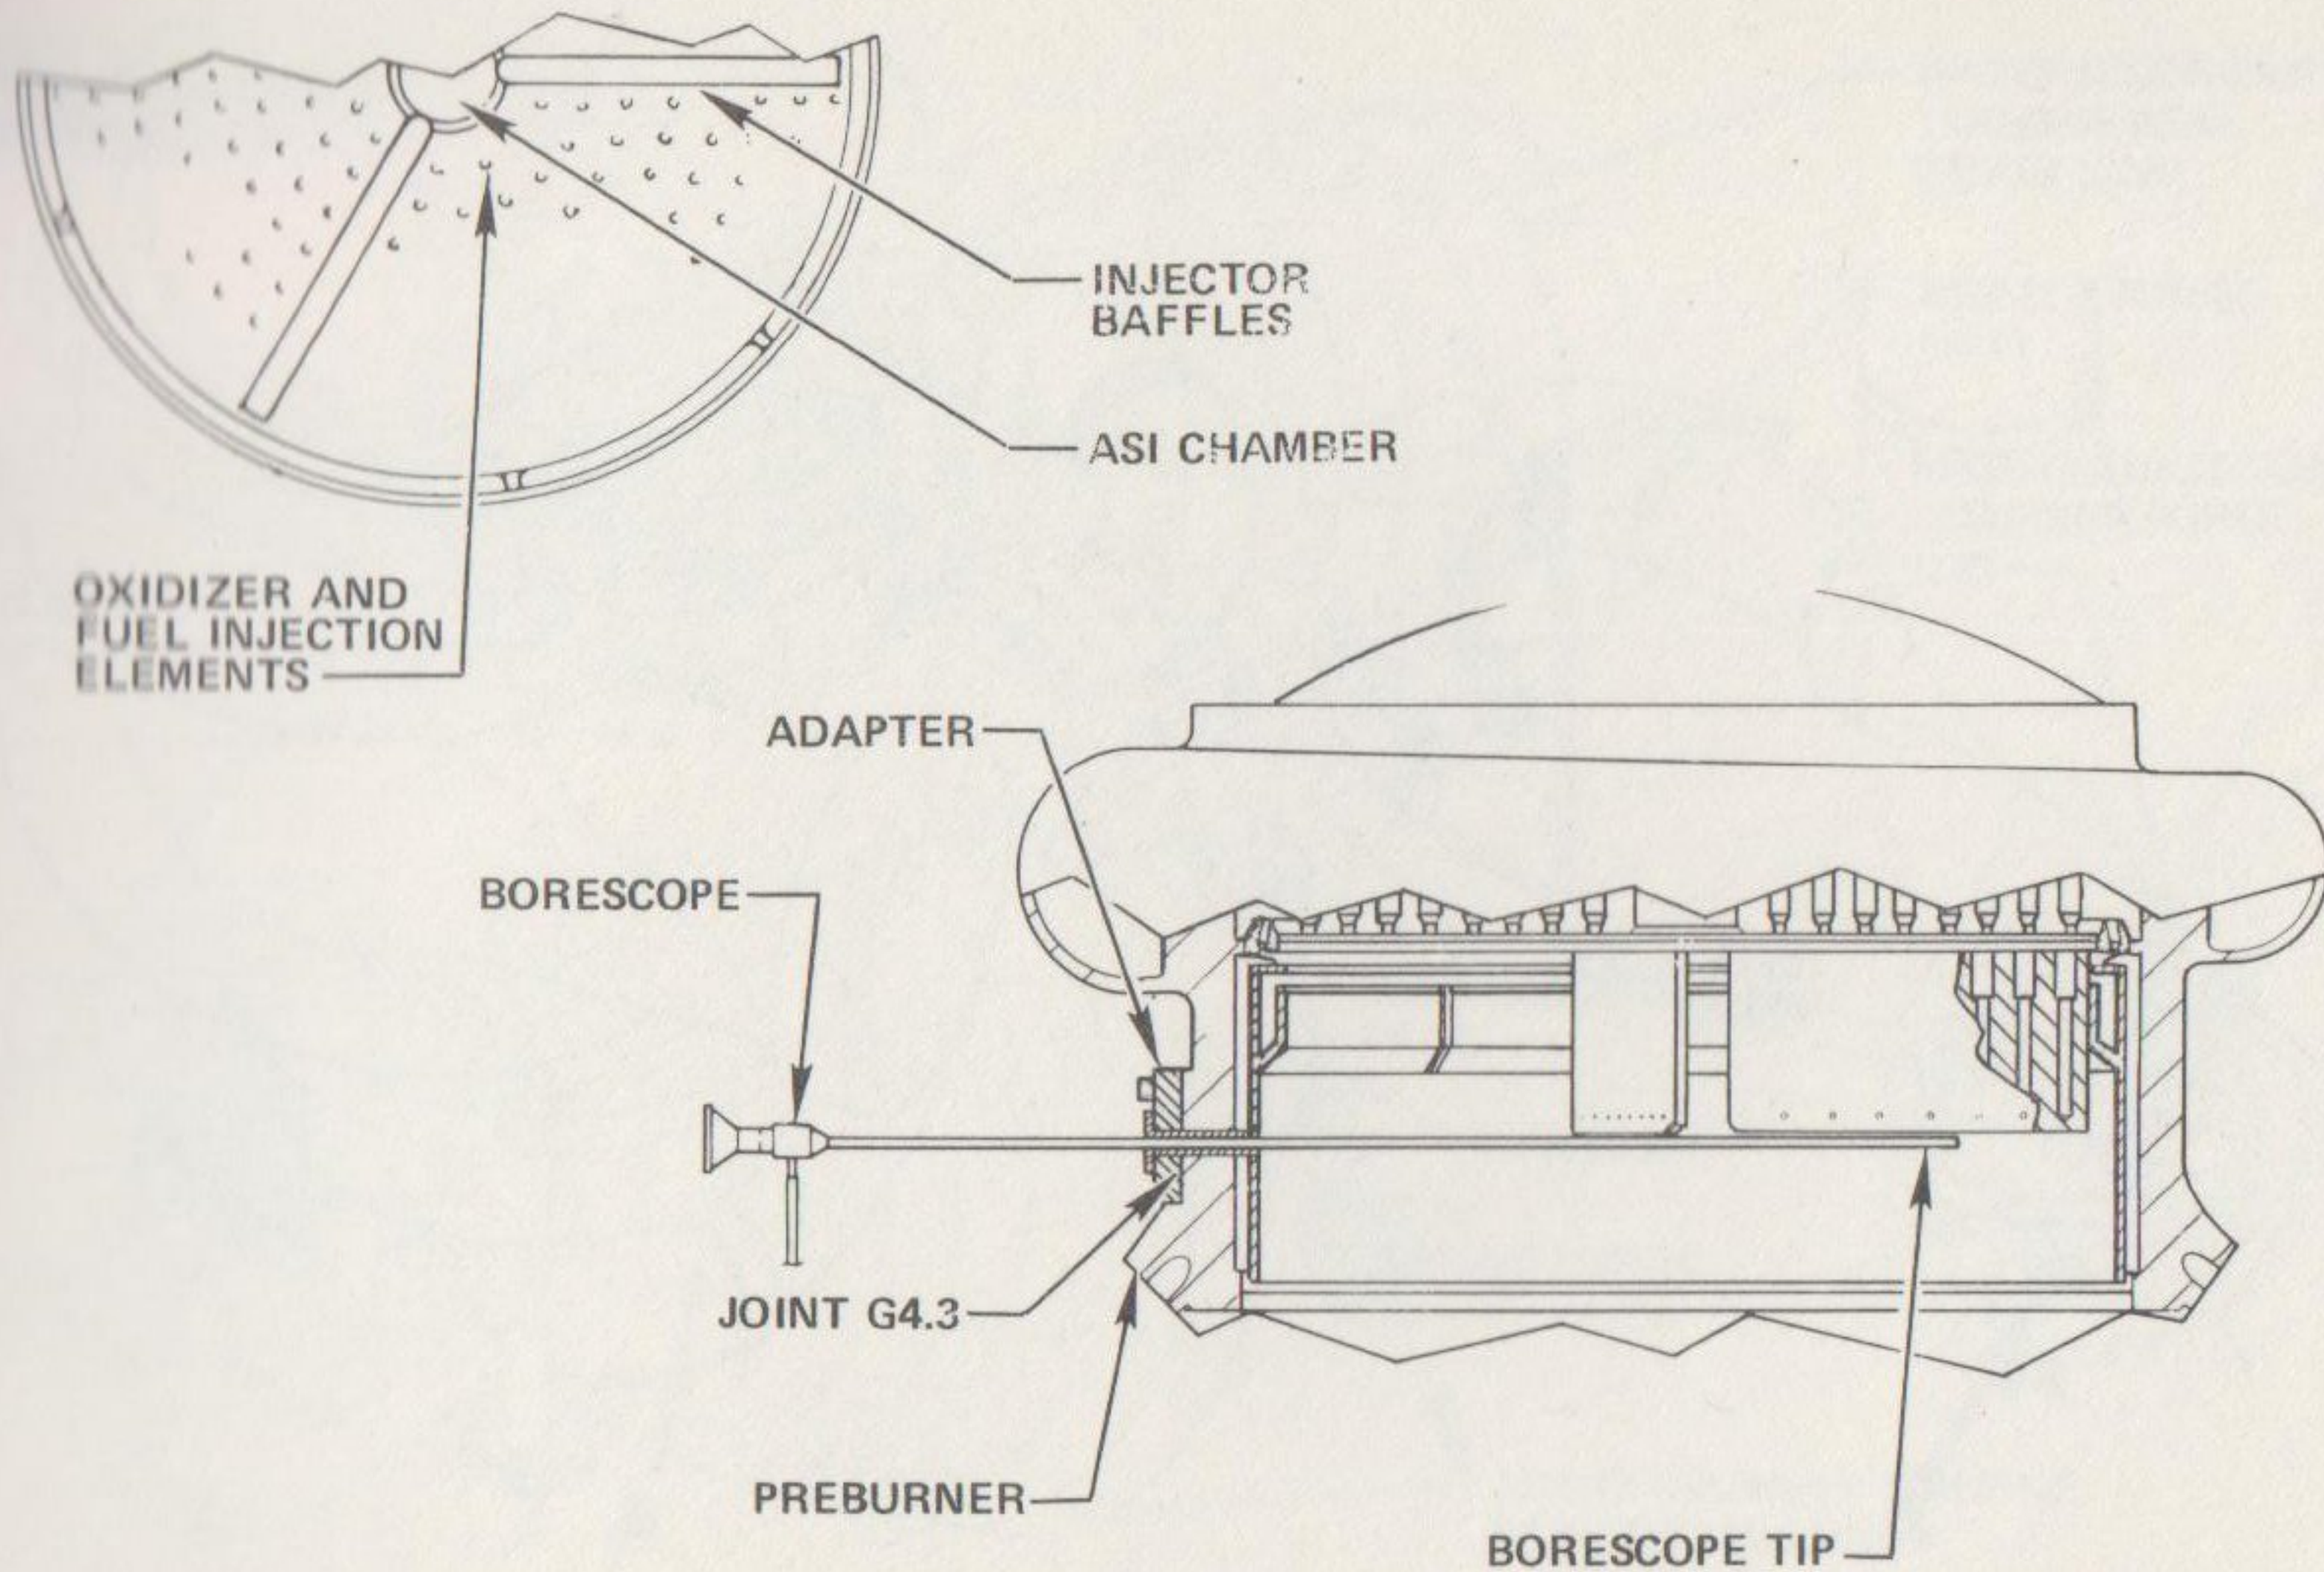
PREBURNER COMBUSTION AREA INSPECTION
